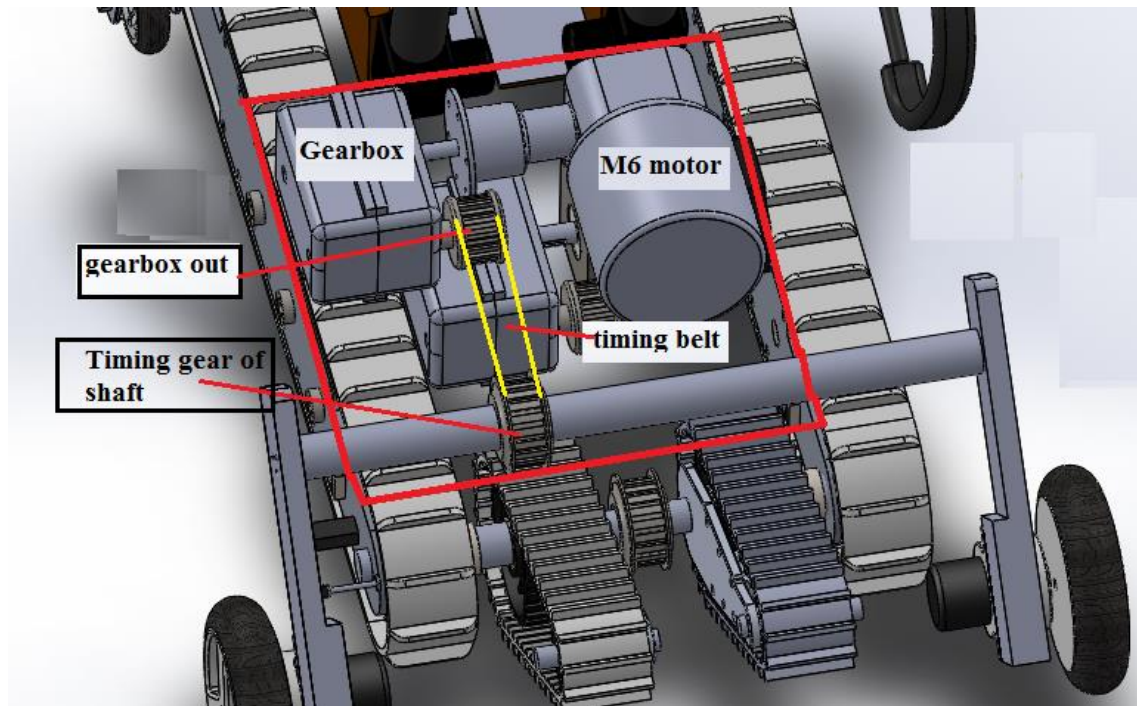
Illustrated of gearbox of rotating rear wheel
